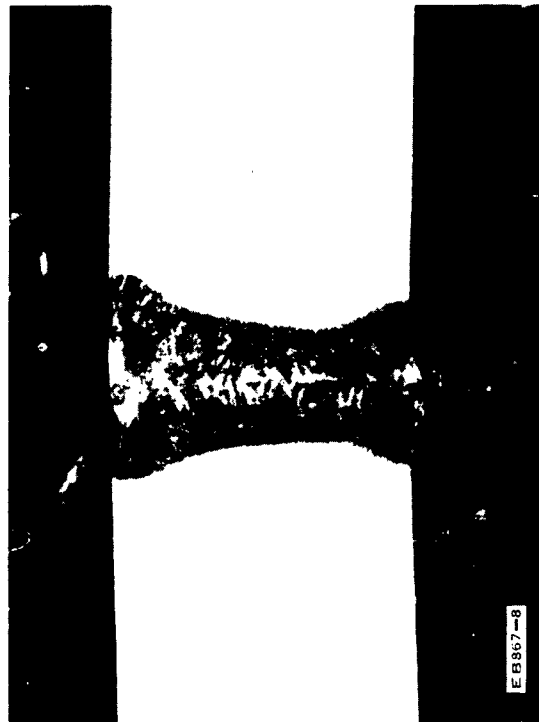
Final Weld Cross-section; X20; 0.090-Inch D6AC; Welded in the Heat Treated Condition
